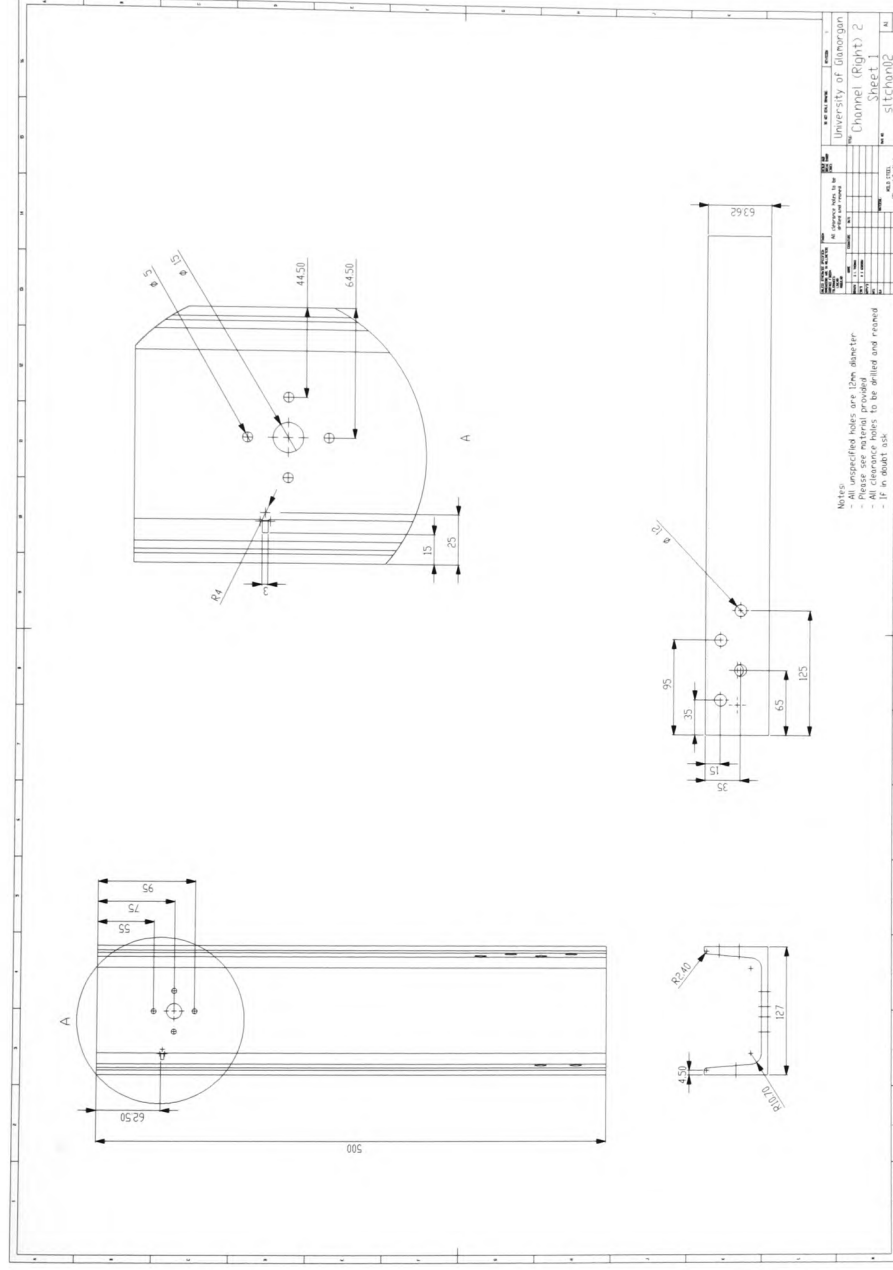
Manufacturing drawing of impact rig right hand strut (sheet 1)
